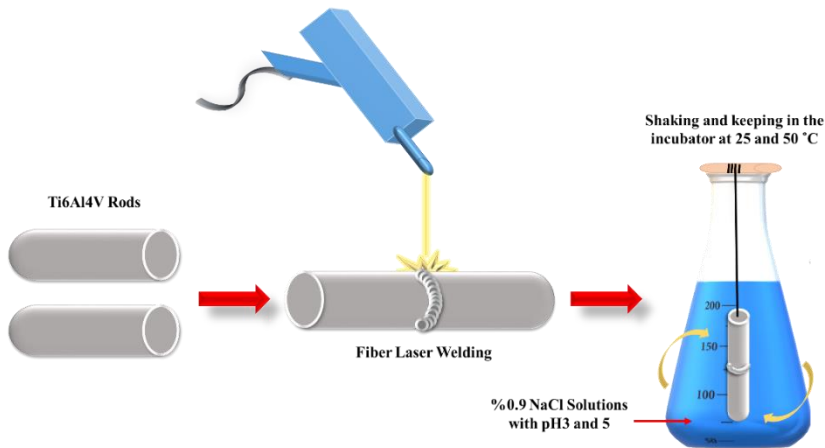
Schematic representation of laser welding application and corrosion testing
